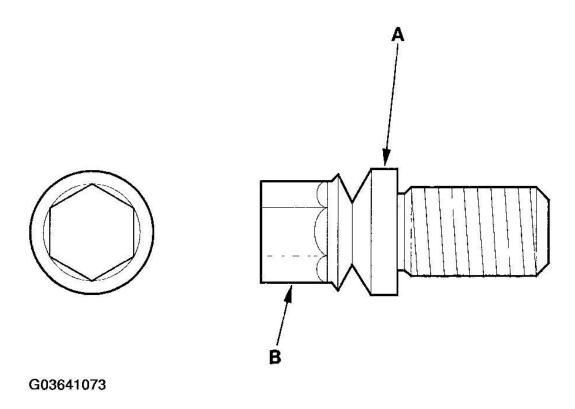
Identifying Shear Bolts And Hex Heads Courtesy of AMERICAN HONDA MOTOR CO., INC.
